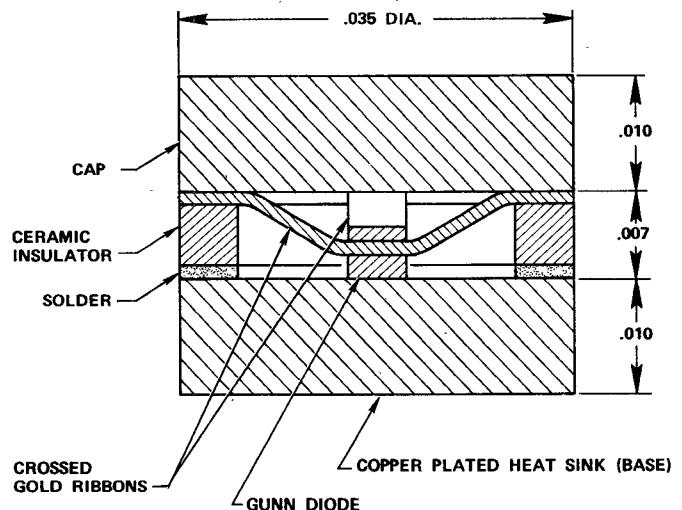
Package for millimeter-wave Gunn diodes. Dimensions are in inches.
